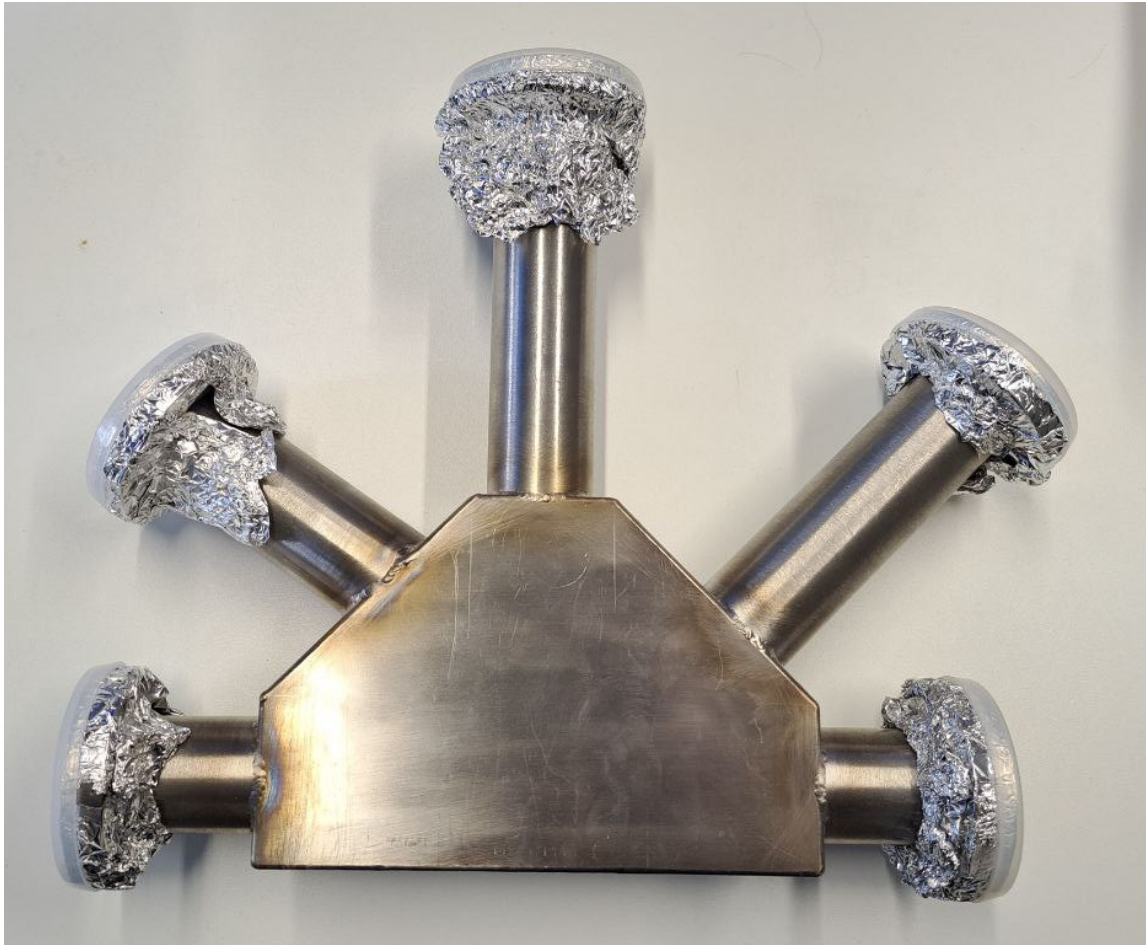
Appearance of the manufactured vacuum chamber for the C-shape bending magnets.
